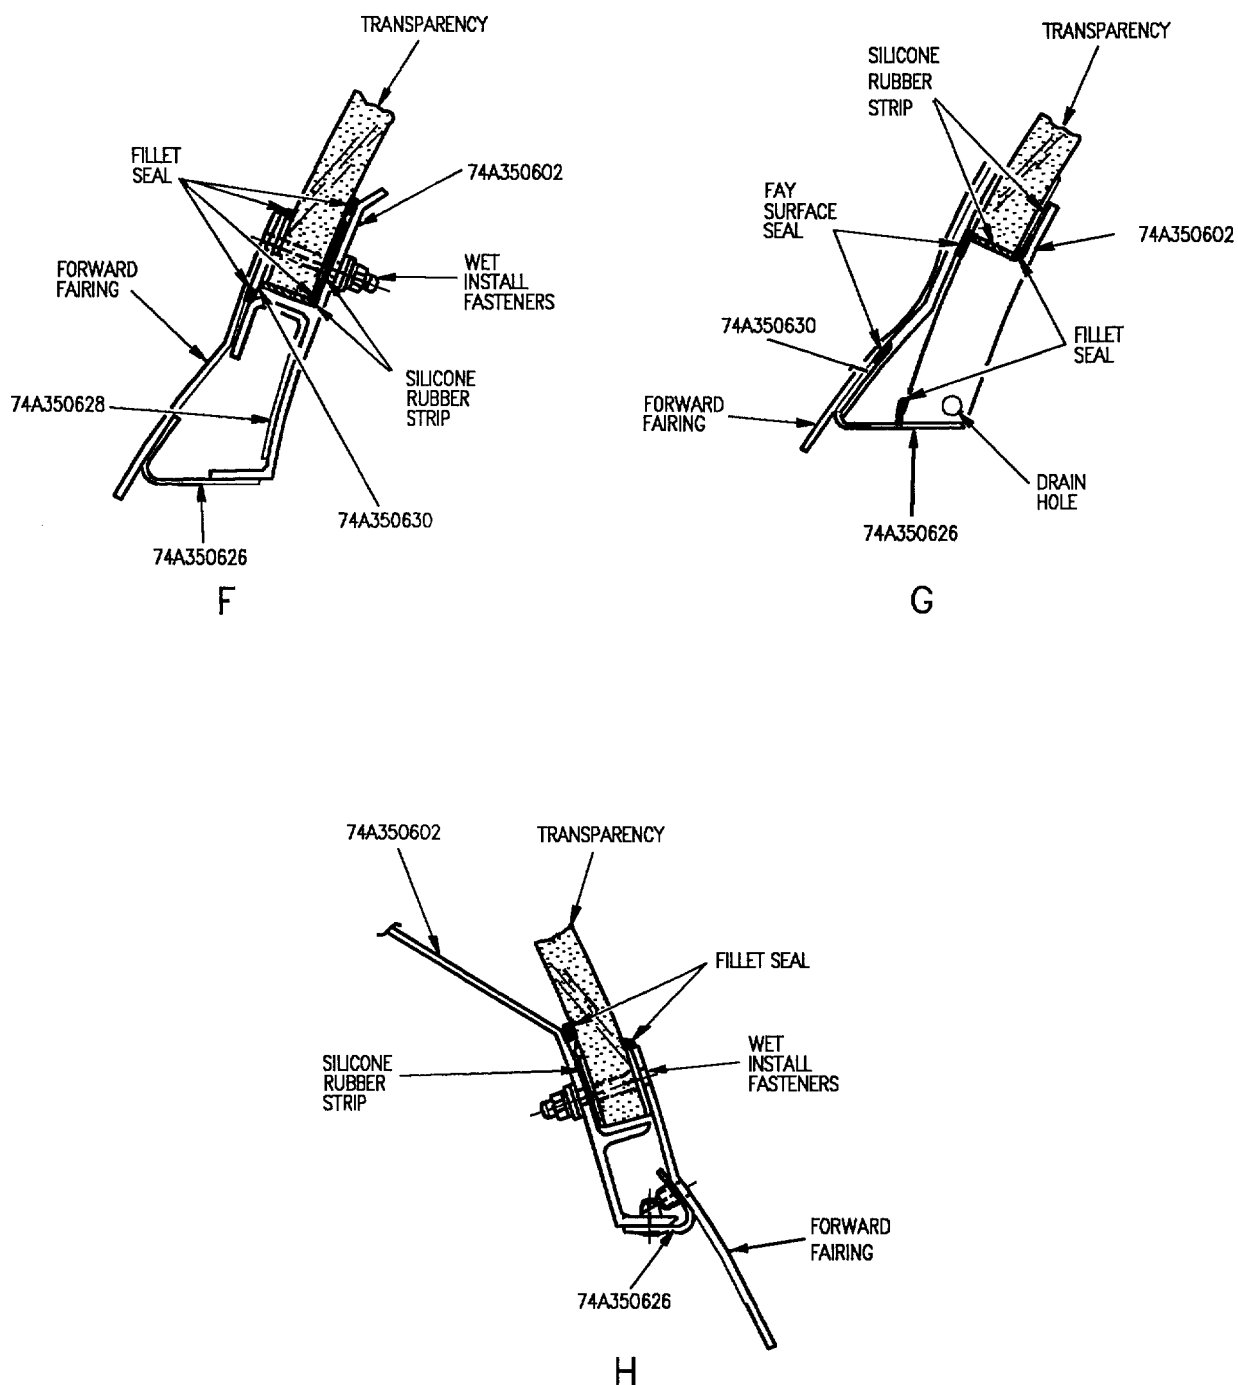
Inspection or Replacement - Forward Fairing (Sheet 4)
